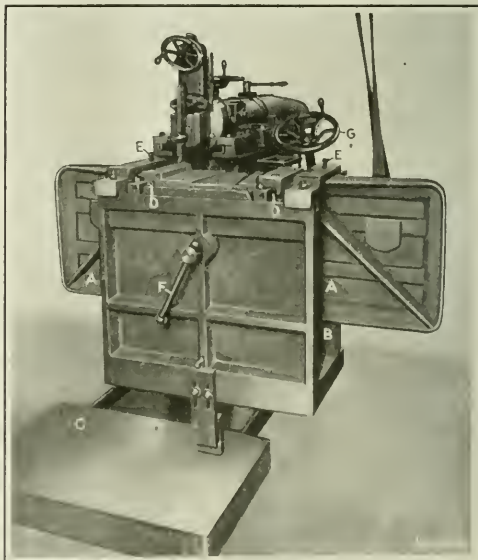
Thirty-two-inch Shaper equipped for planing the Column Bearing in Tables of Multiple-spindle Drilling Machines
